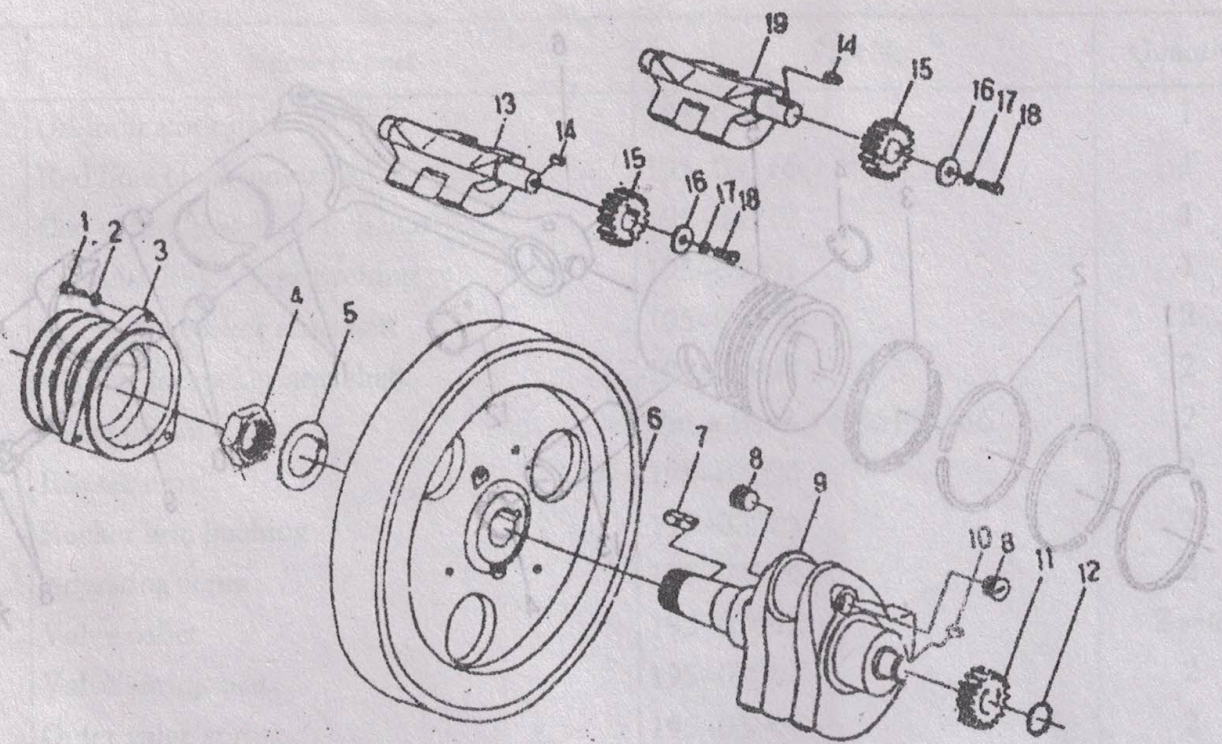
Fig. V Flywheel, Crankshaft and Balancing Mechanism
